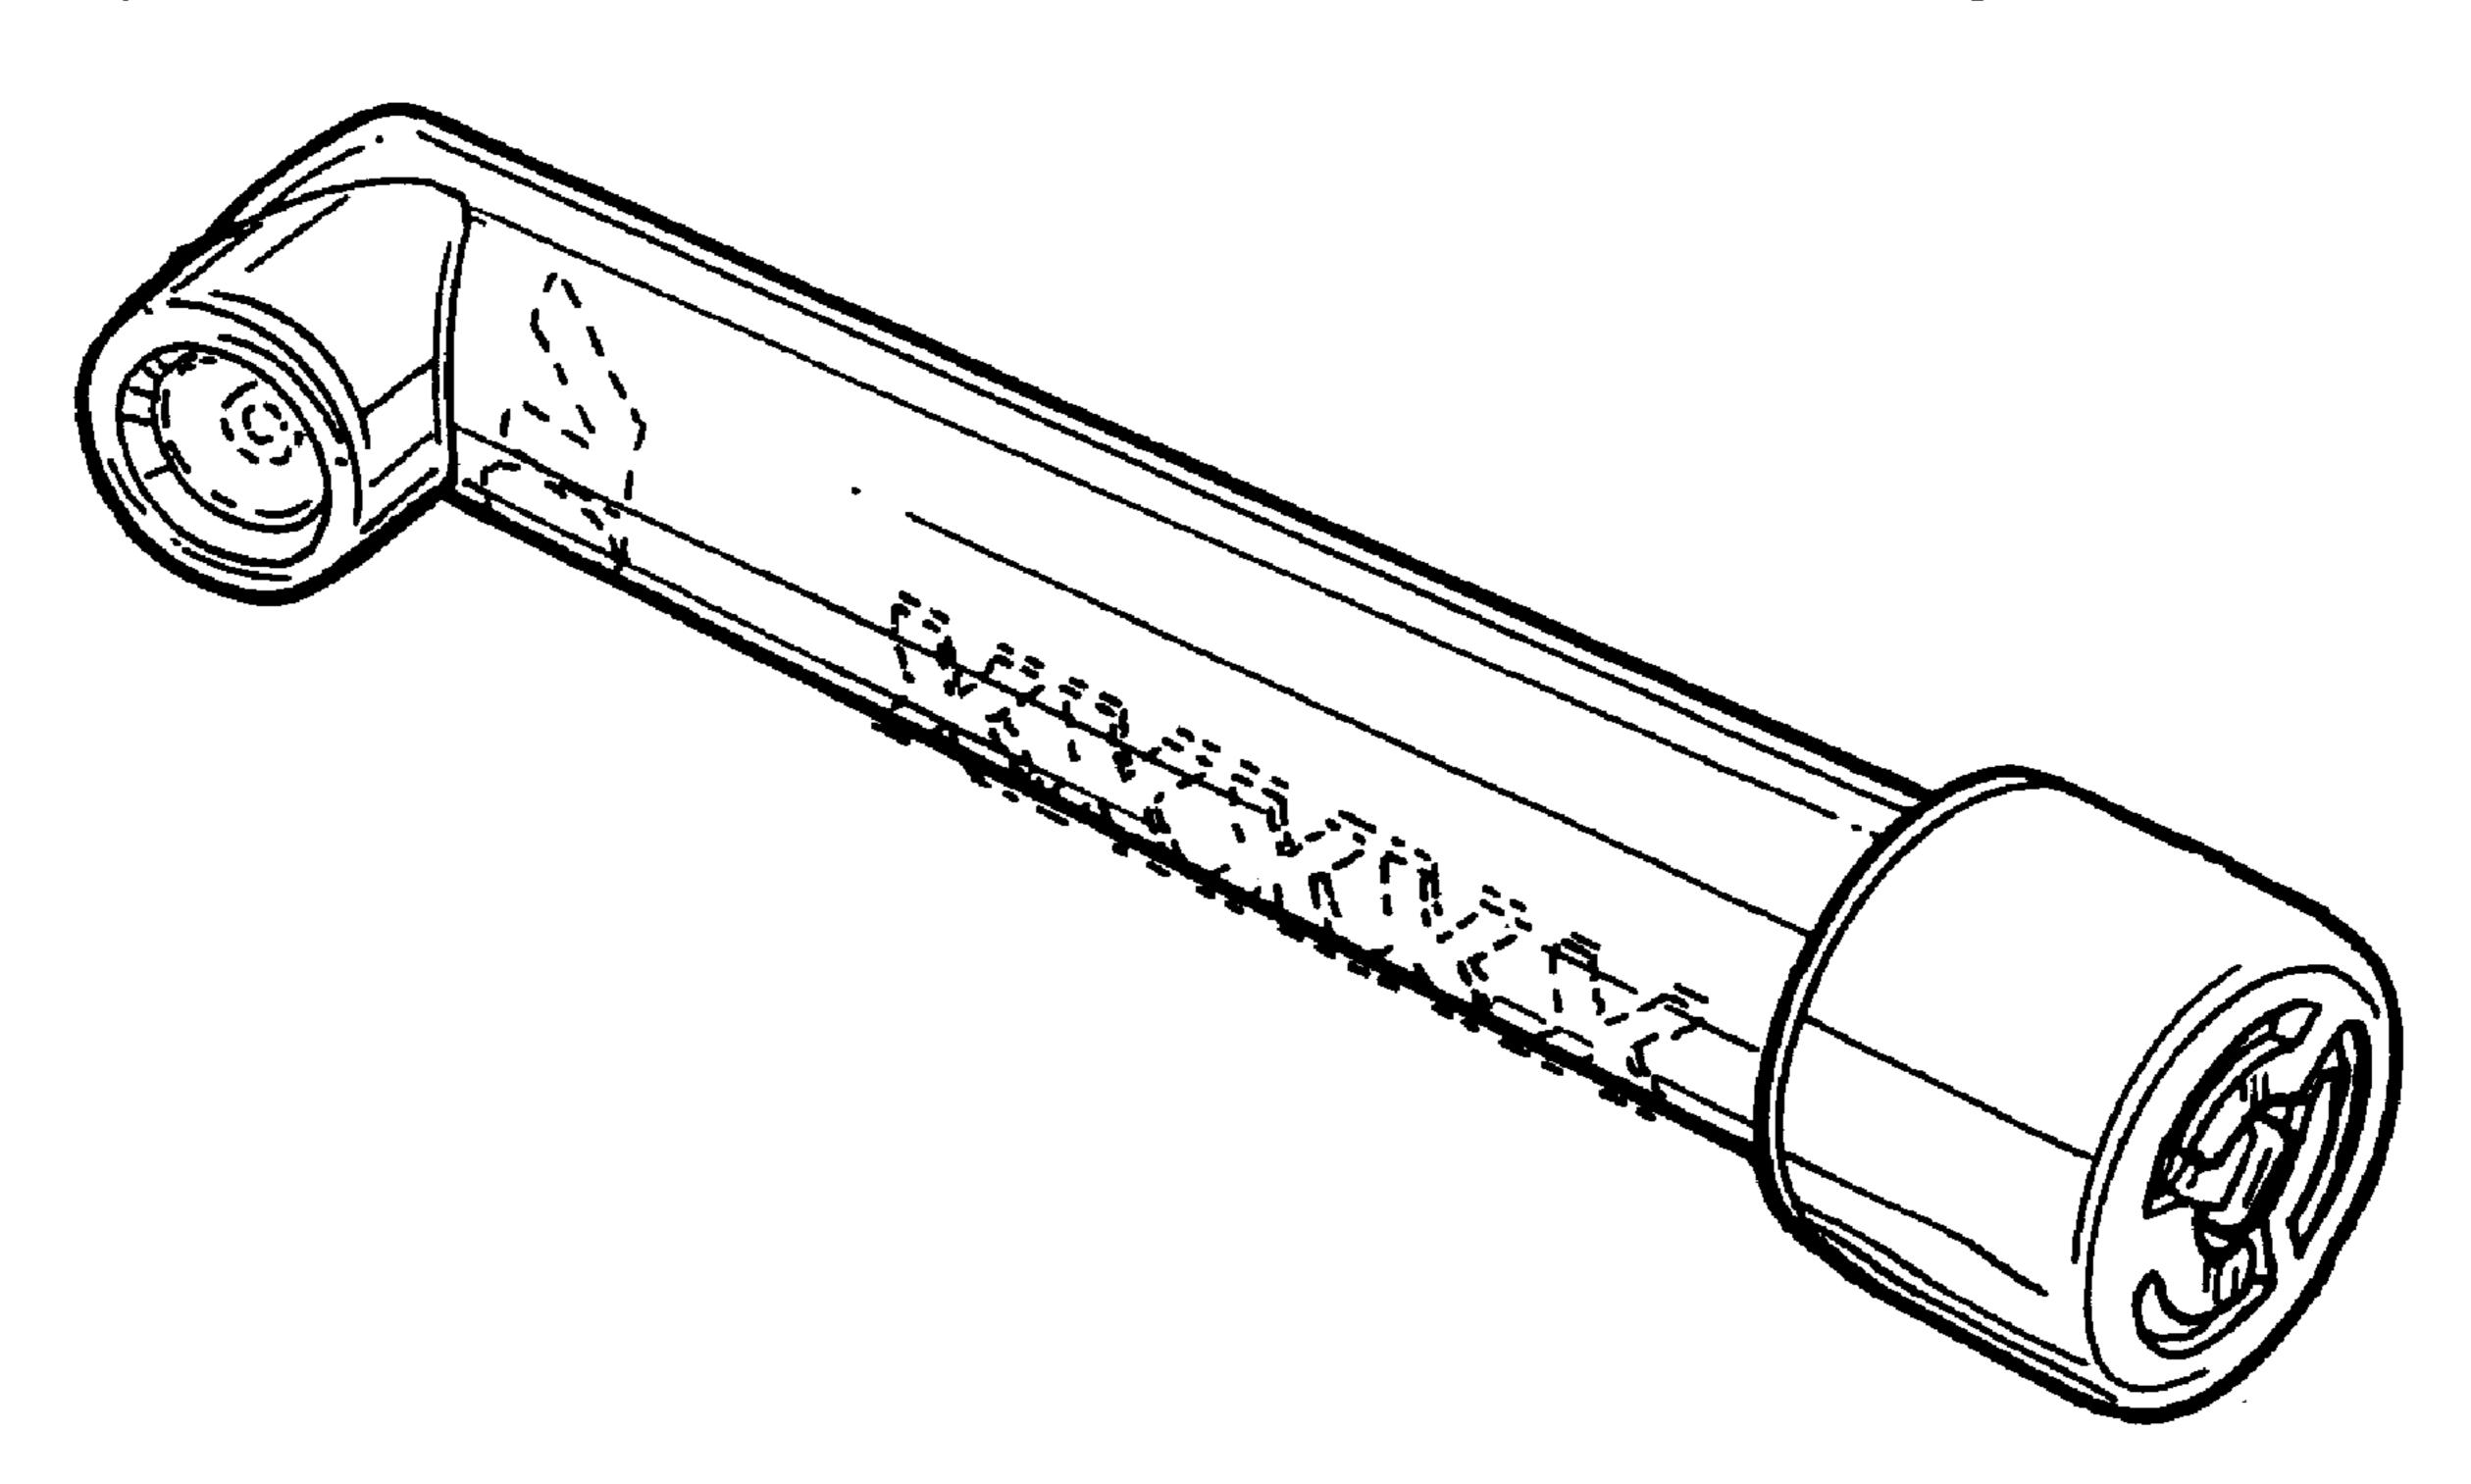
is a perspective view of a tire pressure gauge according to my novel design.
